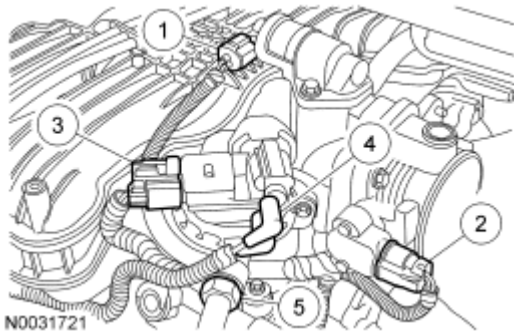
Identifying EGR System Module Vacuum Connector & Throttle Position Sensor Electrical Connector
